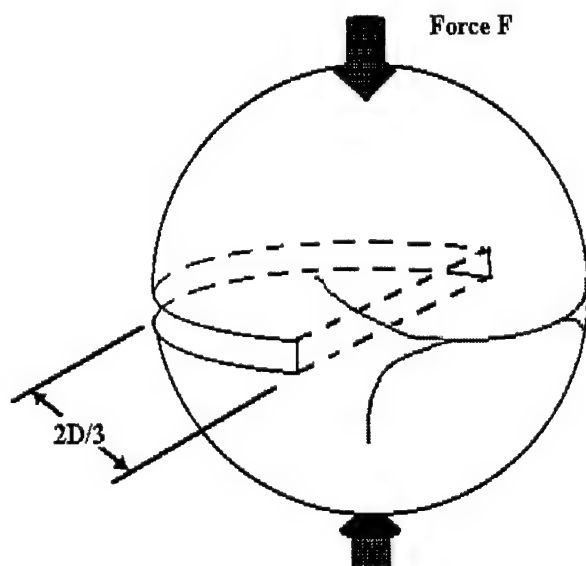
Method to split open a quenched bearing ball with a thermally induced crack from a surface or near-surface flaw.
